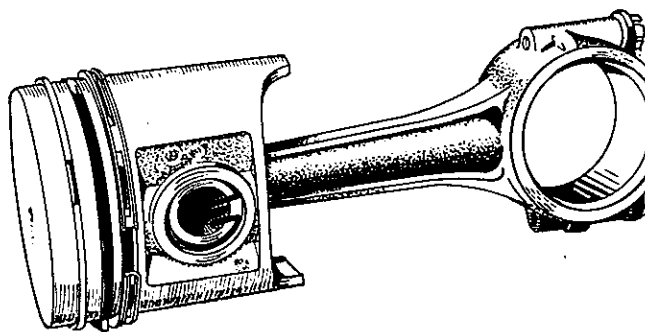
CONNECTING ROD ASSEMBLY FOR USE ON J-SERIES SPARK IGNITION ENGINES
